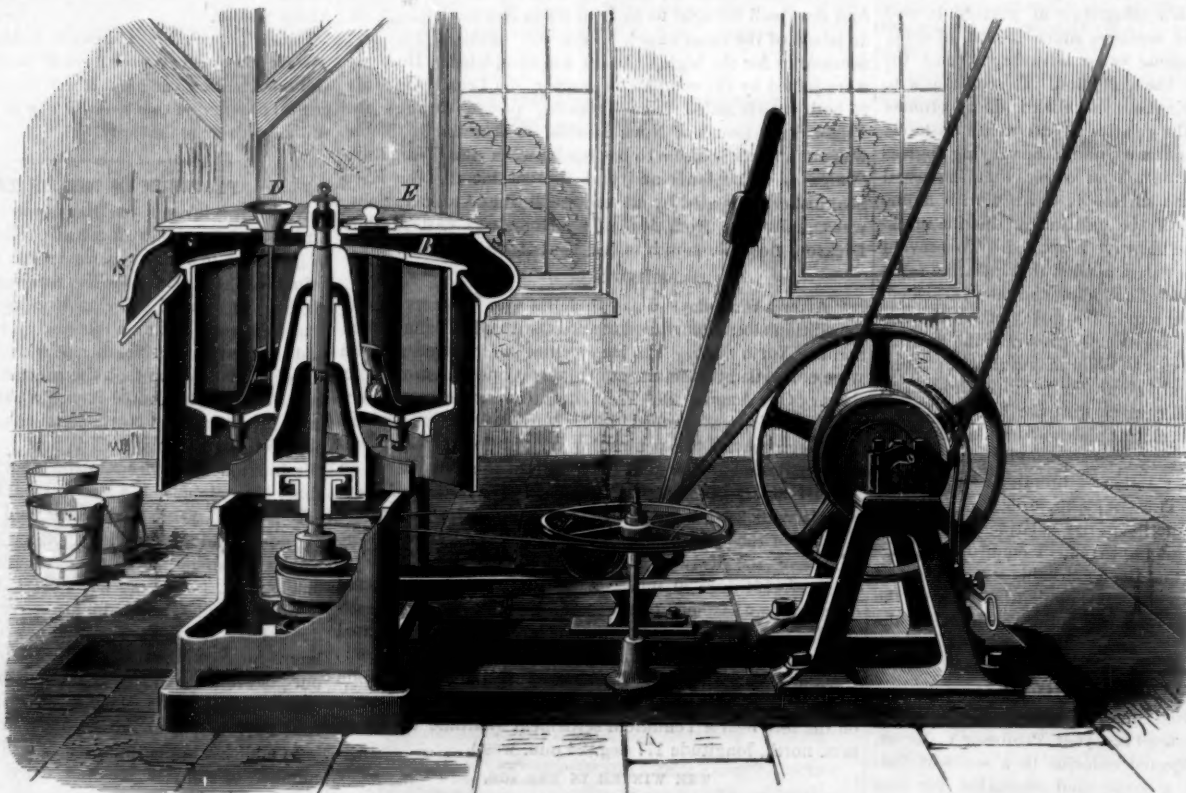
LEFELDT AND LEUTSCH'S CENTRIFUGAL MILK-SKIMMING MACHINE.
